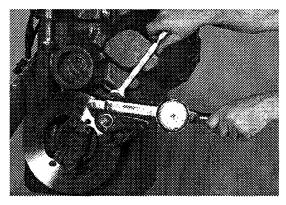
Mounting screws to be installed to allow free movement of calliper pads to disc. Tighten jam nut. See torque chart. See page 4-4 for brake information.
